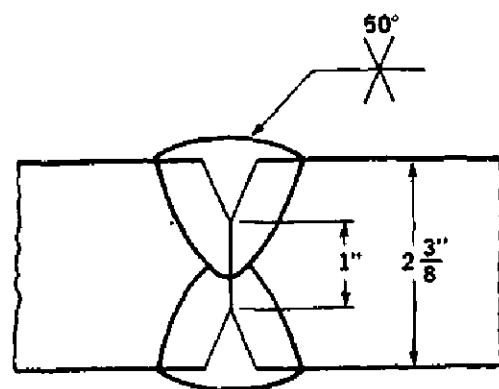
High current, two-pass butt welding in 2-3/8 in. thick motor cases: joint design.
